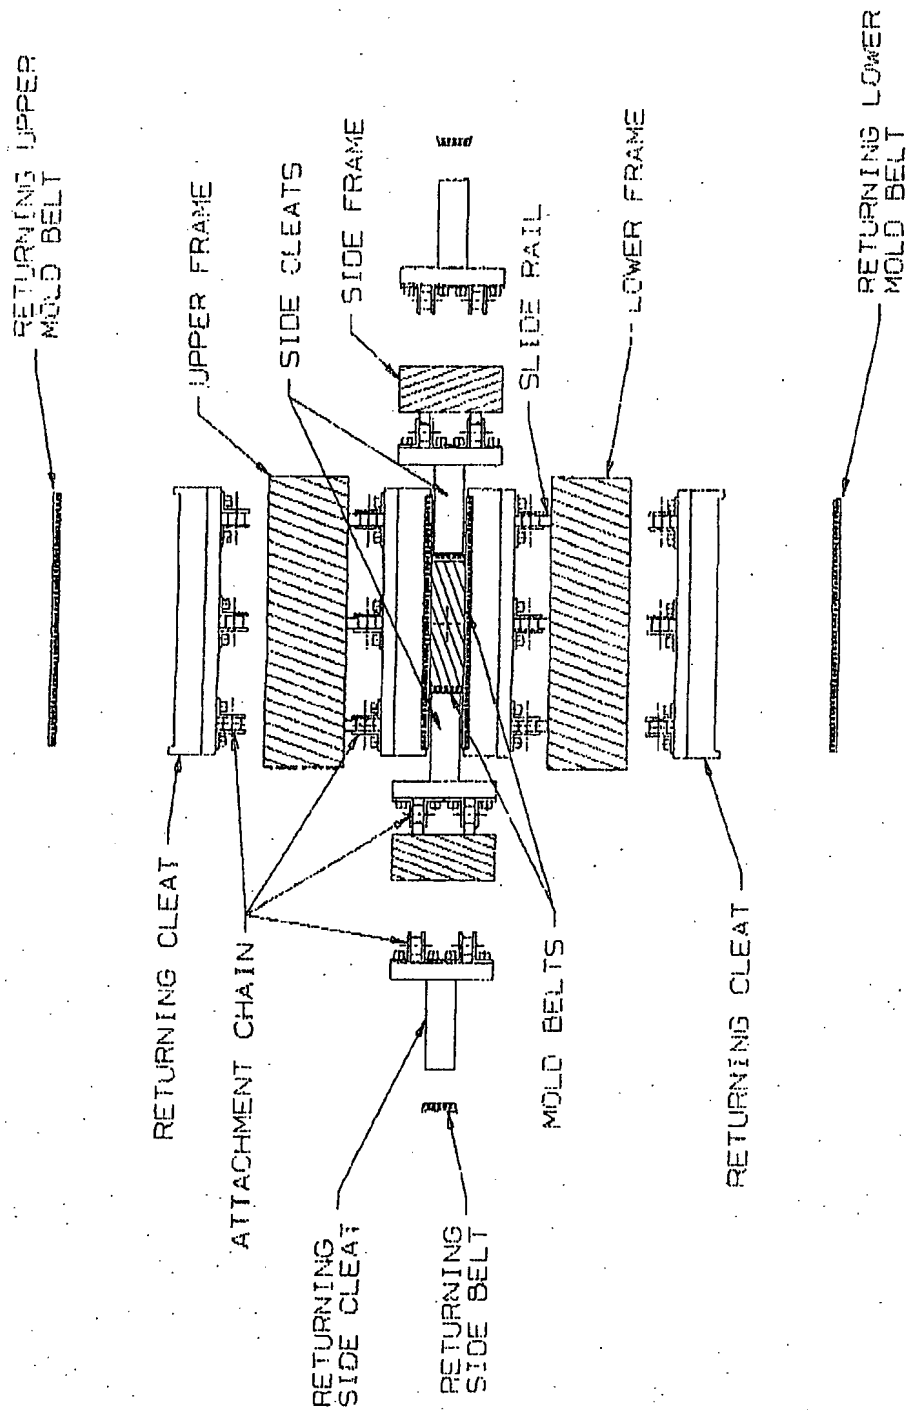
SECTION VIEW OF FORMING APPARATUS SHOWING FOUR MOLD BELTS AND FOUR CLEATED CONVEYORS.
